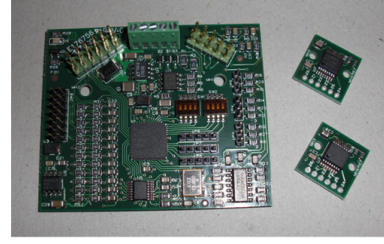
Left: Microcontroller board developed to control the joint mechanism. Right: Magnetic rotary encoders for measuring the joint angle.
